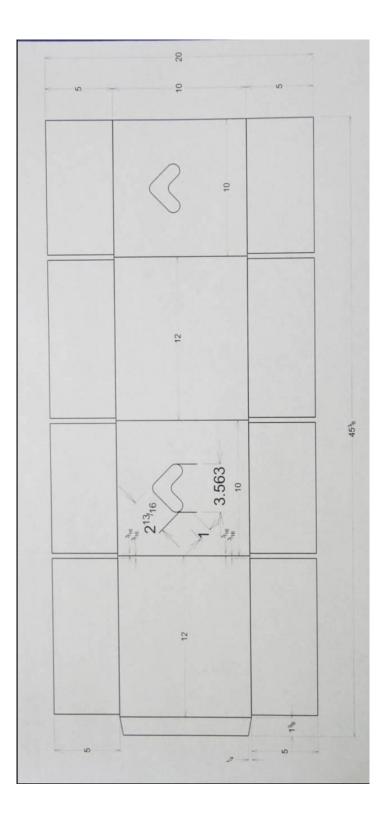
Box sample design having Conventional purpose hand hole.
